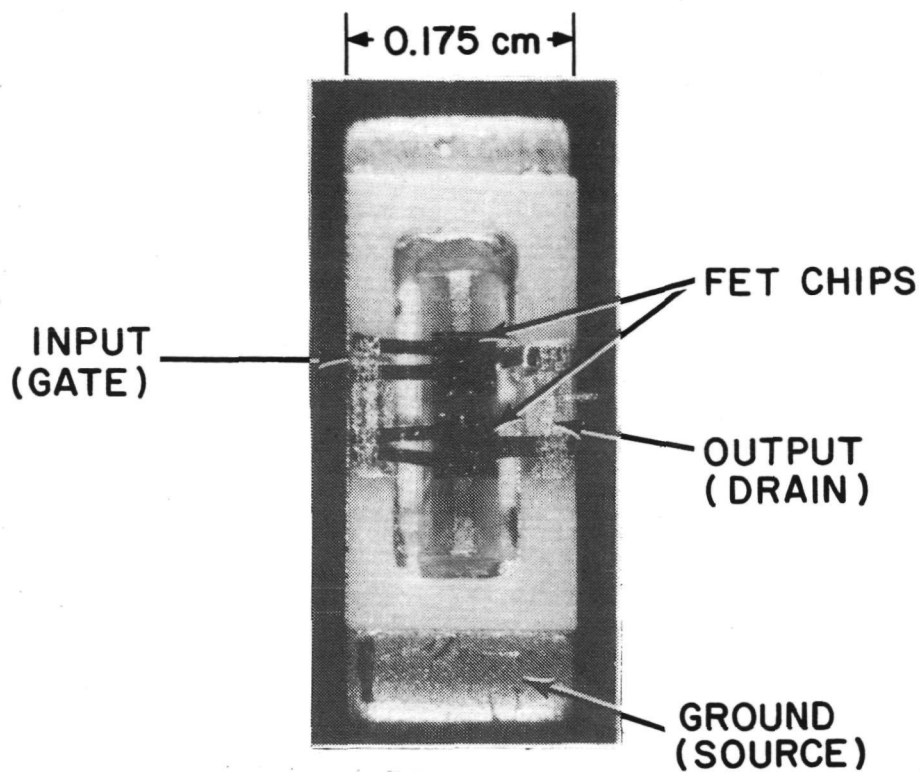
Photograph of two FET pellets flip-chip mounted on a carrier.
